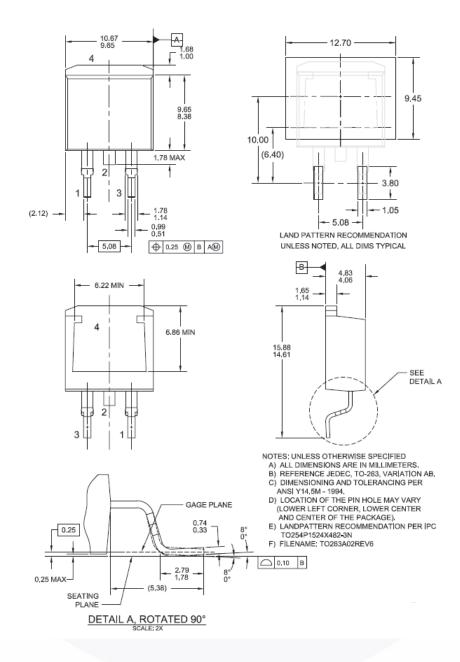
TO263 (D²PAK), Molded, 2-Lead, Surface Mount
